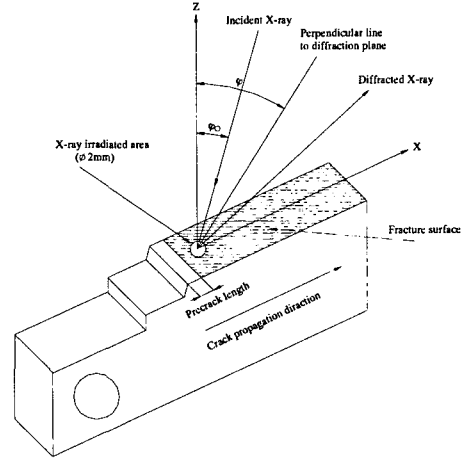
Schematic illustration of X-ray irradiated area on fatigue fracture surface
